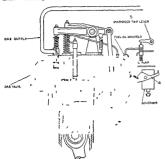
SECTIONAL VIEW OF A FOUR STROKE CYCLE DUAL FUEL DIESEL FNGINE
